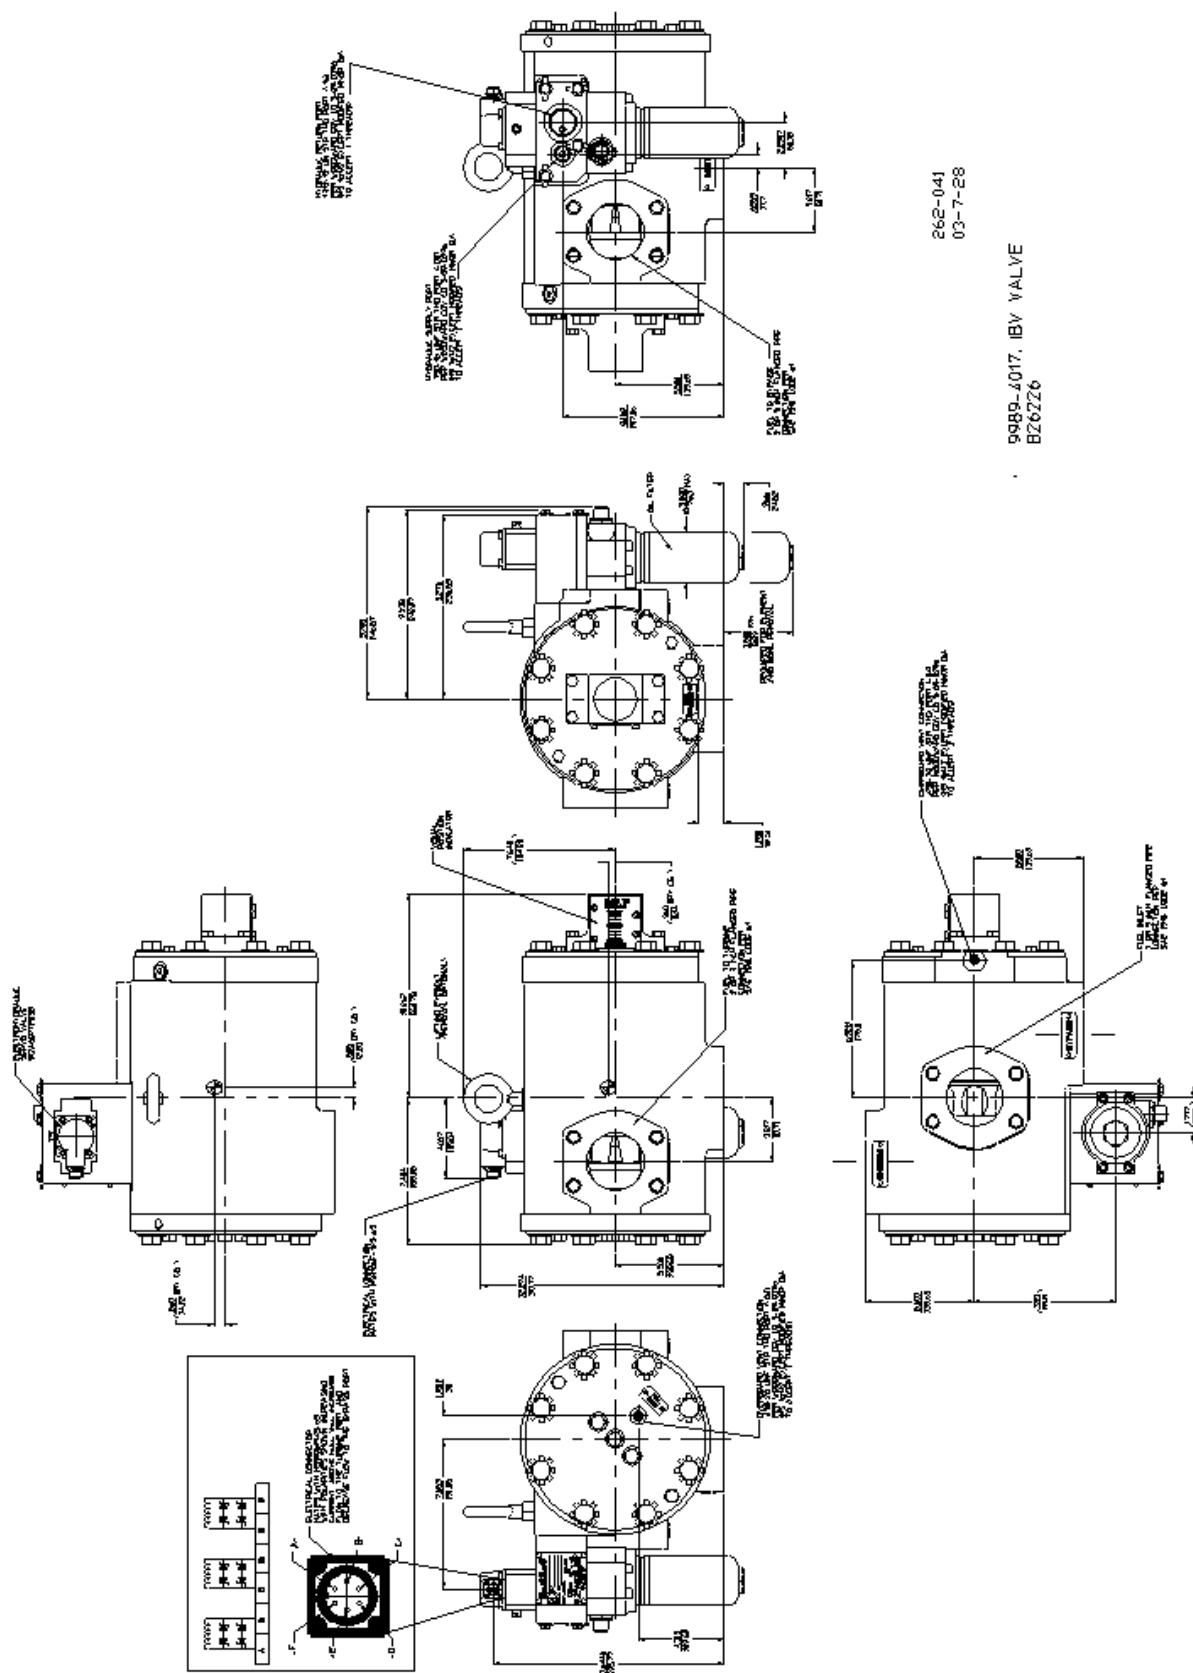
Outline Drawing—Bypass Valve (without optional LVDT)
